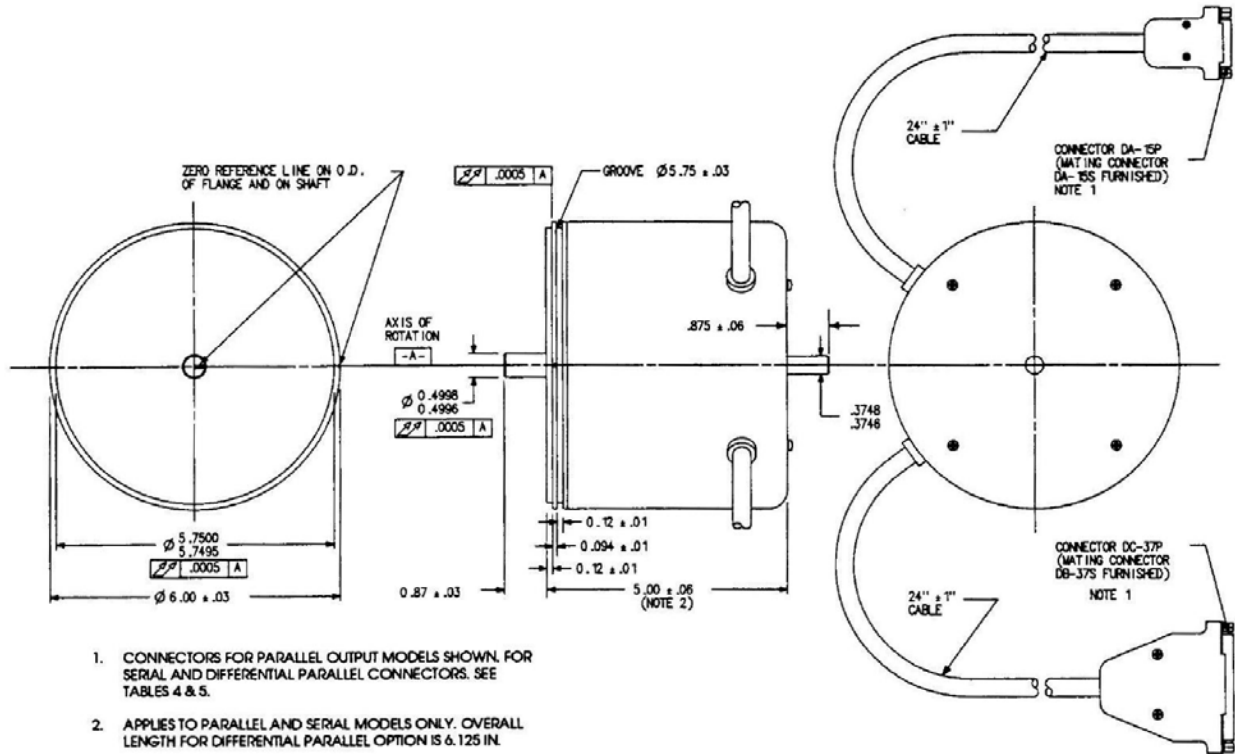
, OUTLINE, THROUGH SHAFT ENCODER
